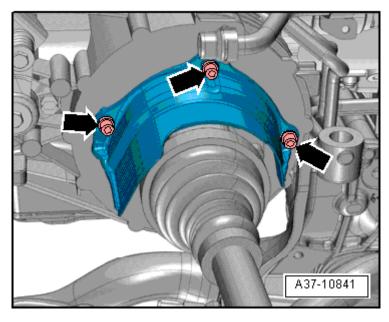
Driveshaft Heat Shield - Tightening Specification Courtesy of AUDI OF AMERICA, LLC
